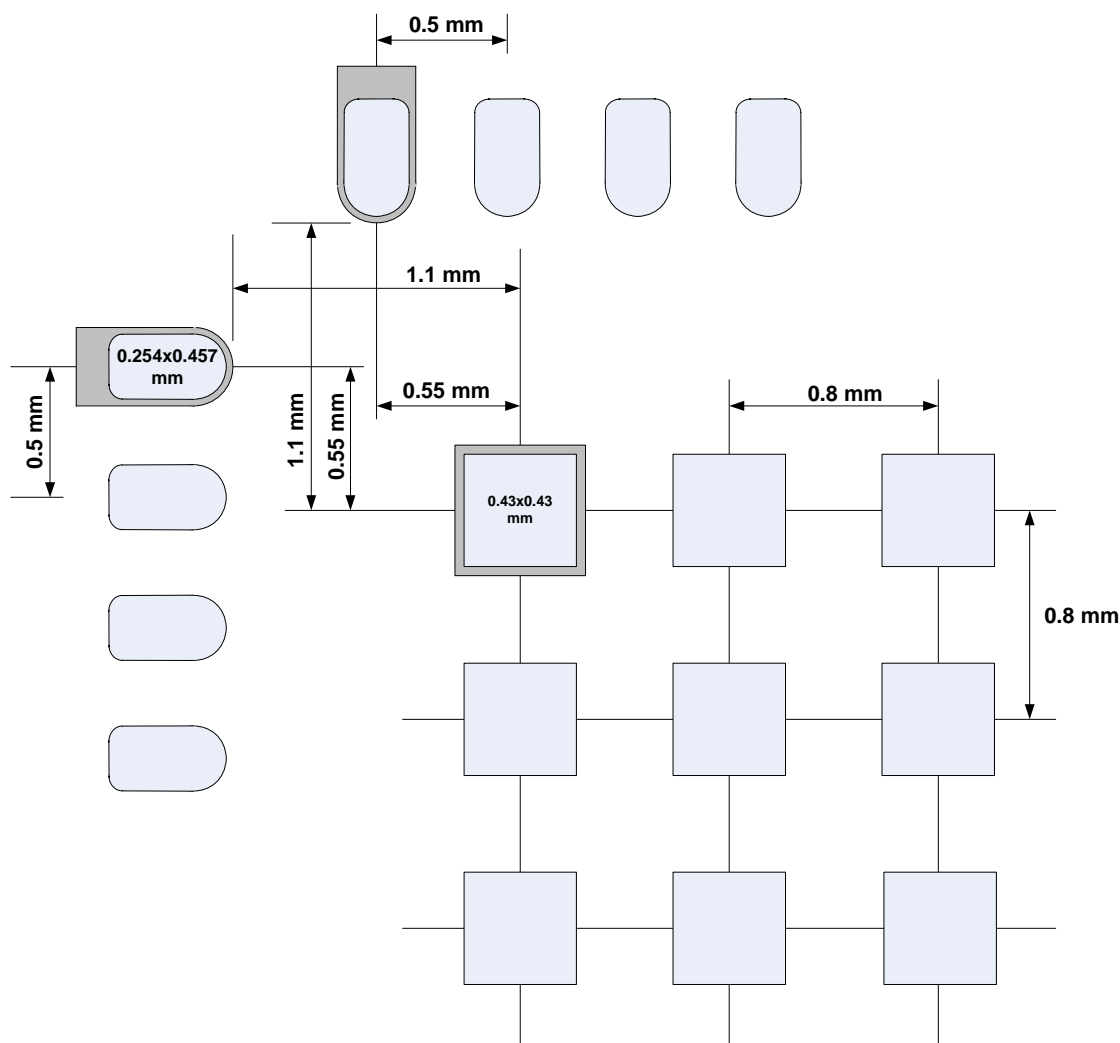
99-Pin LGA Solder Stencil Pattern
